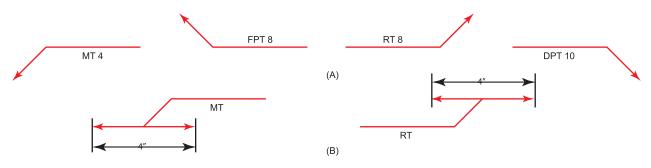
Two methods of designating the length of weld to be tested.
